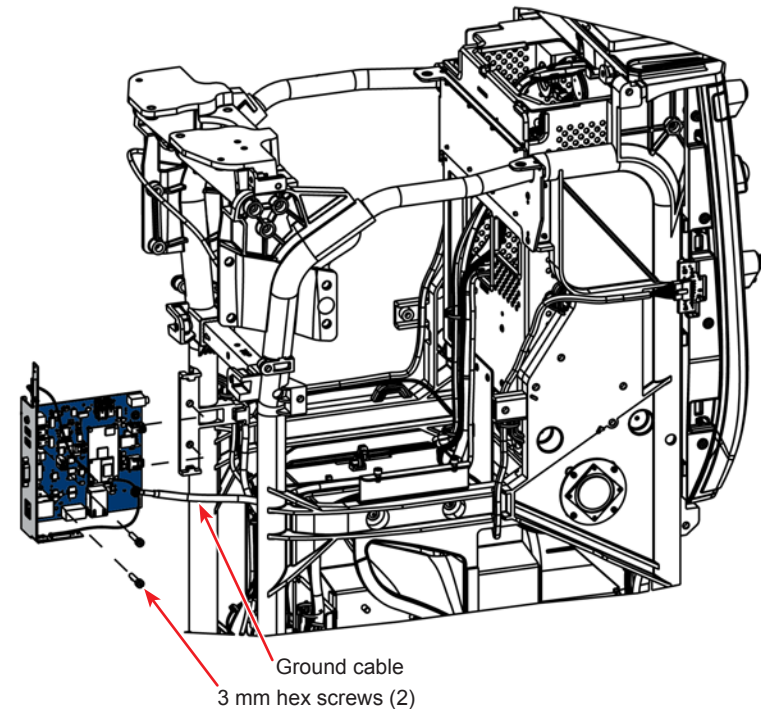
Rear Panel I/O-Wireless Module Assembly Removal
